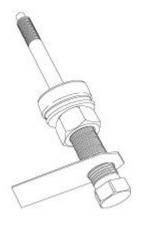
Rear Crankshaft Seal Remover 8506 Courtesy of CHRYSLER LLC
